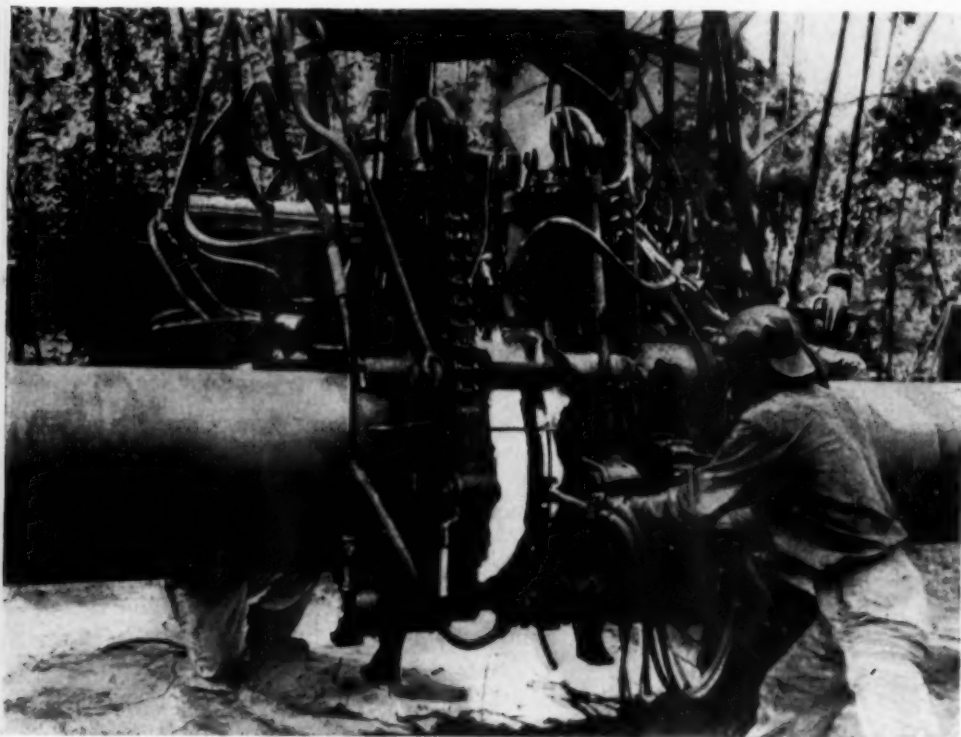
Clamp and Blowpipe Equipment for Pressure Welding (Solid Phase Welding) of Pipe in 24-In. Overland Line. One set of clamps acts as a holding vise; end pressure is applied by the other set of clamps, and is powered by the accompanying tractor-crane. The annular arrangement of heating blowpipes may be reciprocated manually during the heating. Courtesy Linde Air Products Co.
